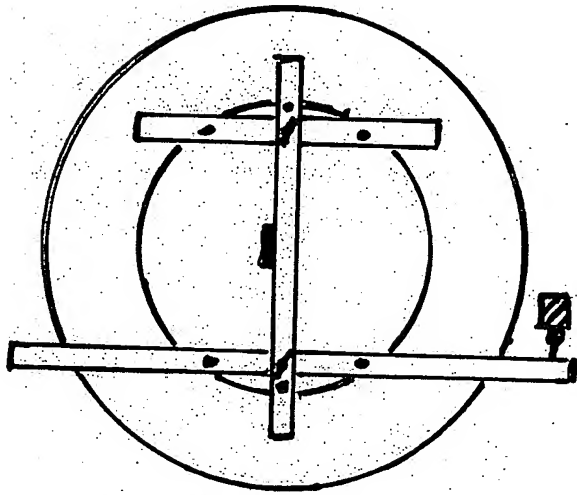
CHECKING ANGLE ON AXLE SPRING PAD
